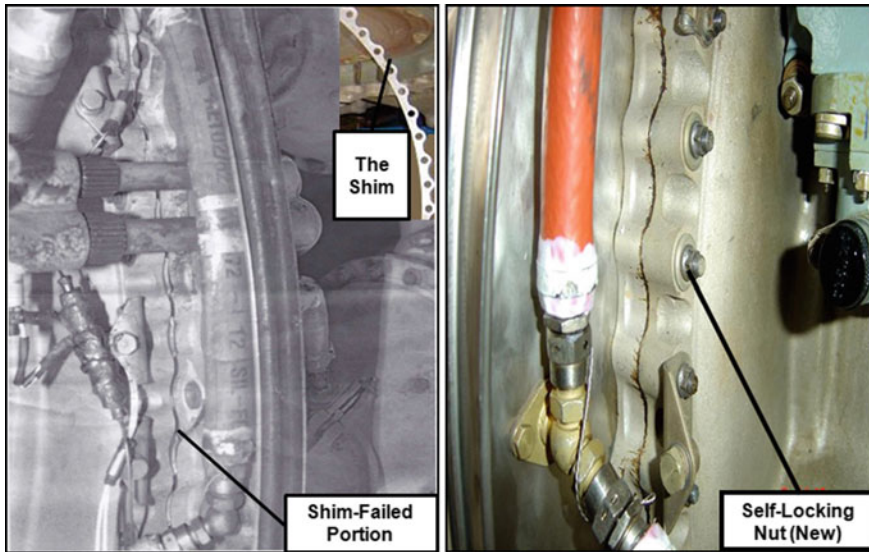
Zone of fatigue failure of compressor shim, before modification (left) and after modification (right)
